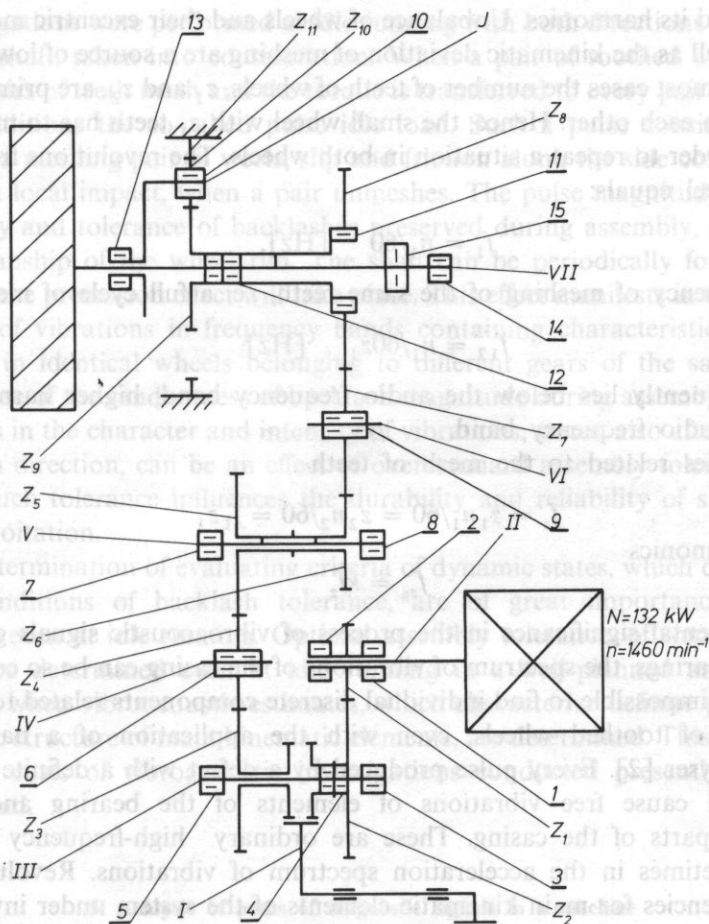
Kinematic diagram of a head with a specification of shafts (I–VII), toothed wheels (Z_1 – Z_{11}) and bearings (1–15)
